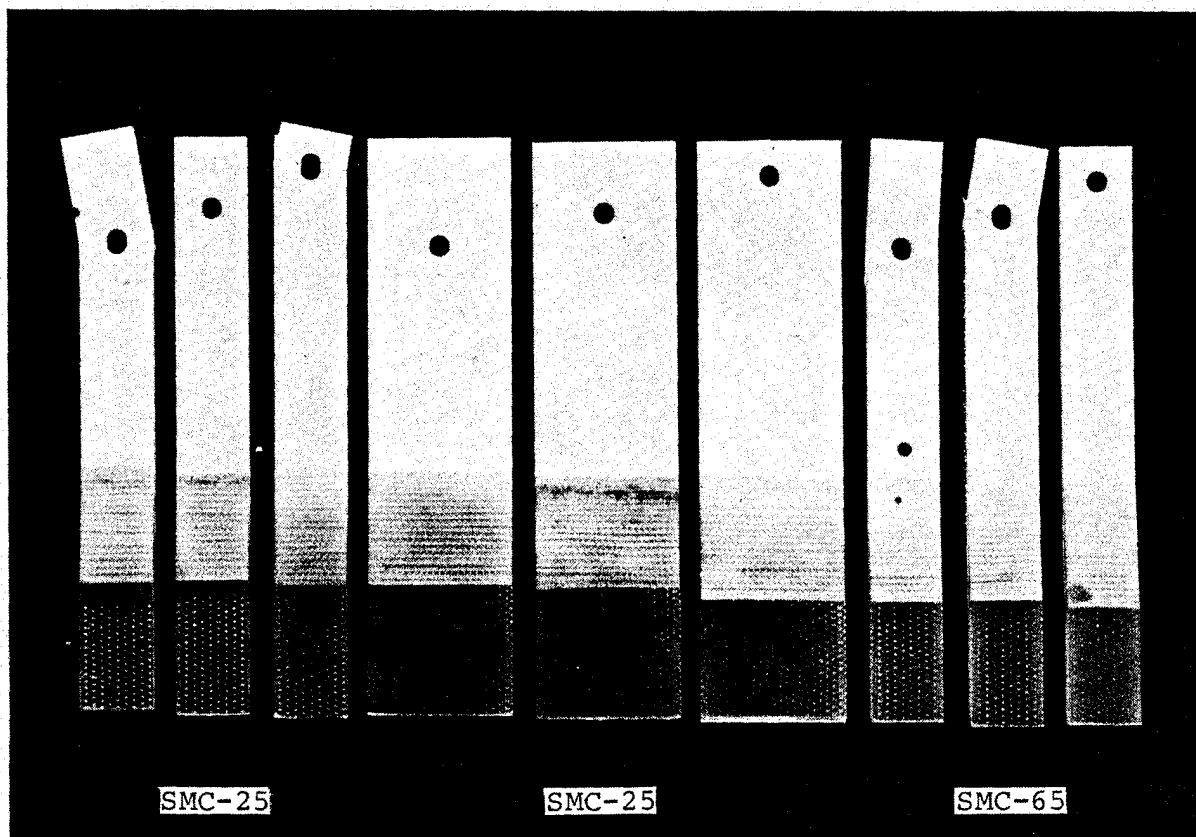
FRACTURED BOLTED JOINT SPECIMENS
